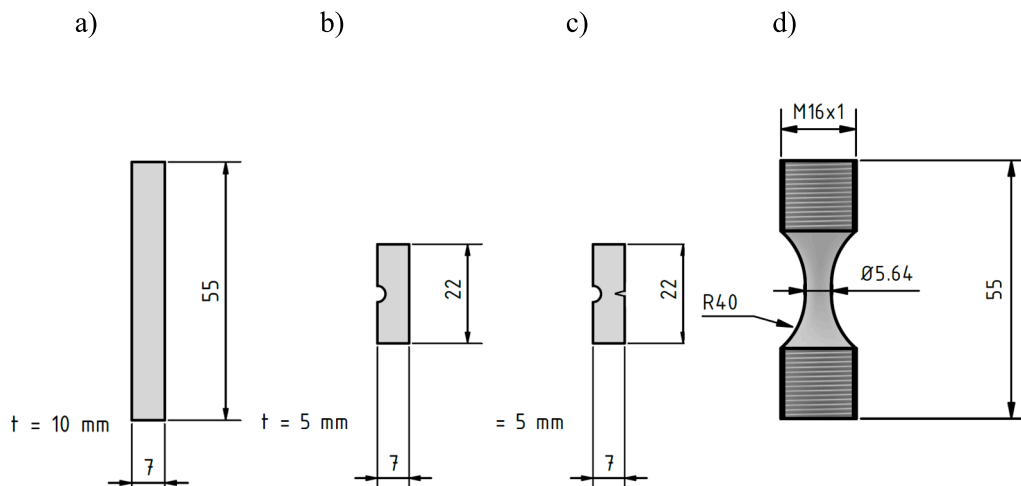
(a) Standard bending specimens (AM-10-S), (b) miniature specimens (AM-10-M) for testing (adapter necessary), (c) micro-notched miniature specimens (only for crack propagation test), and (d) specimen geometry for uni-axial testing.
